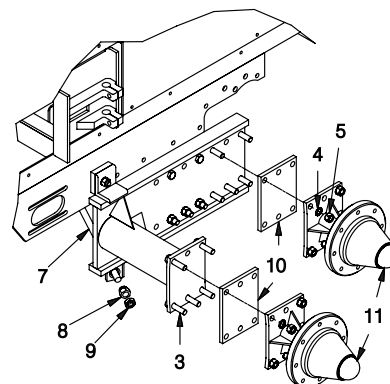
Mounting Spacer Plates, Hubs & Truss Rod
